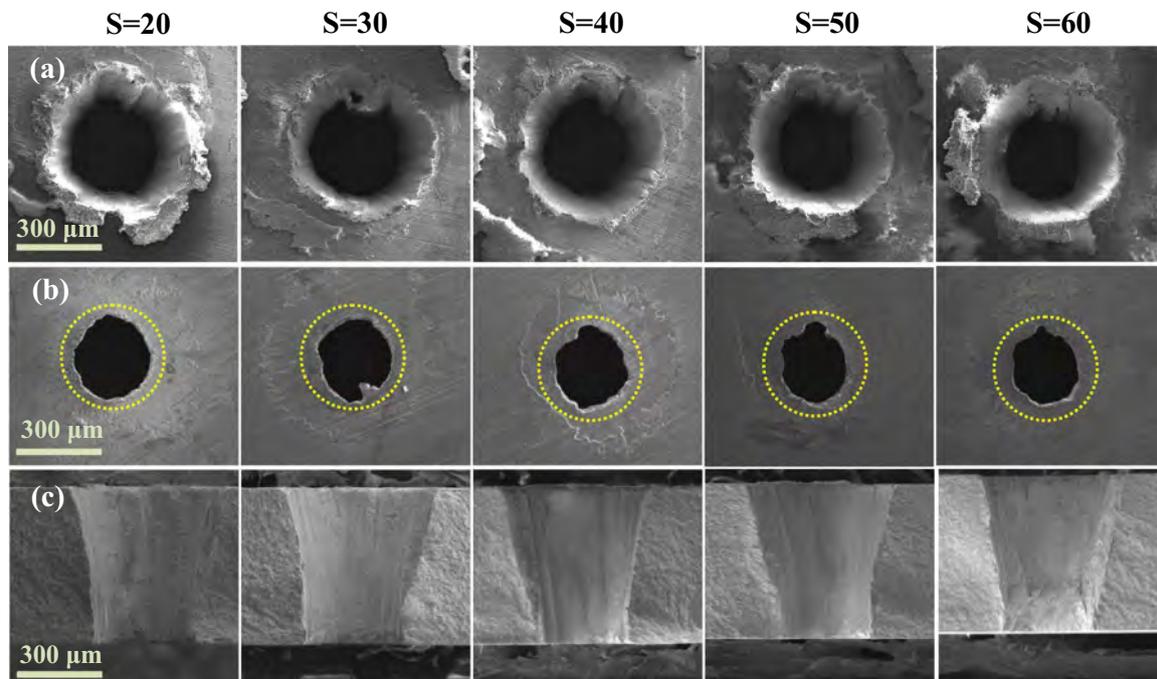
SEM images taken from the (a) front side, (b) back side and (c) cross-section of holes laser machined at 20, 30, 40, 50, 60 mm/min, respectively.
